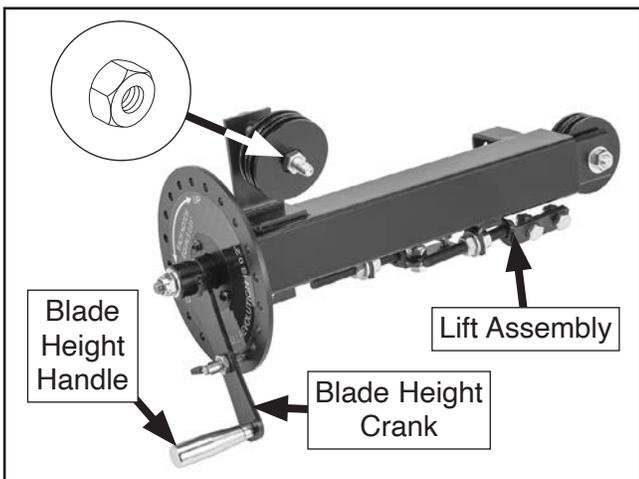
Blade height handle installed in blade height crank and location of hex nut to remove from lift assembly.
